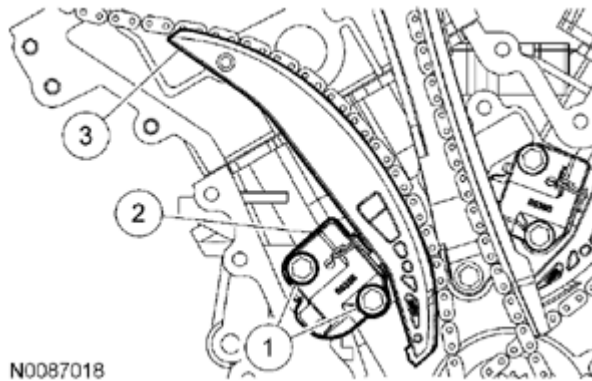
Identifying RH Timing Chain Tensioner, Tensioner Arm And Bolts
